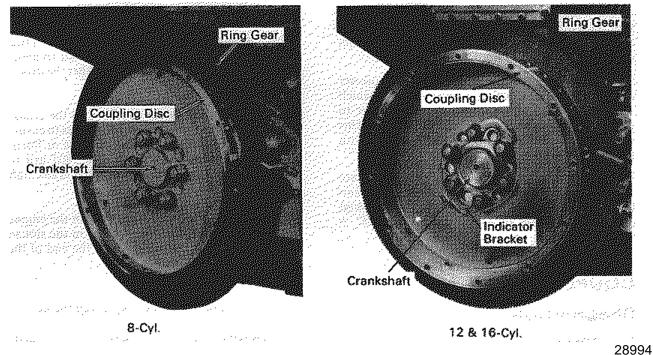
Typical Ring Gear And Coupling Disc Installations
